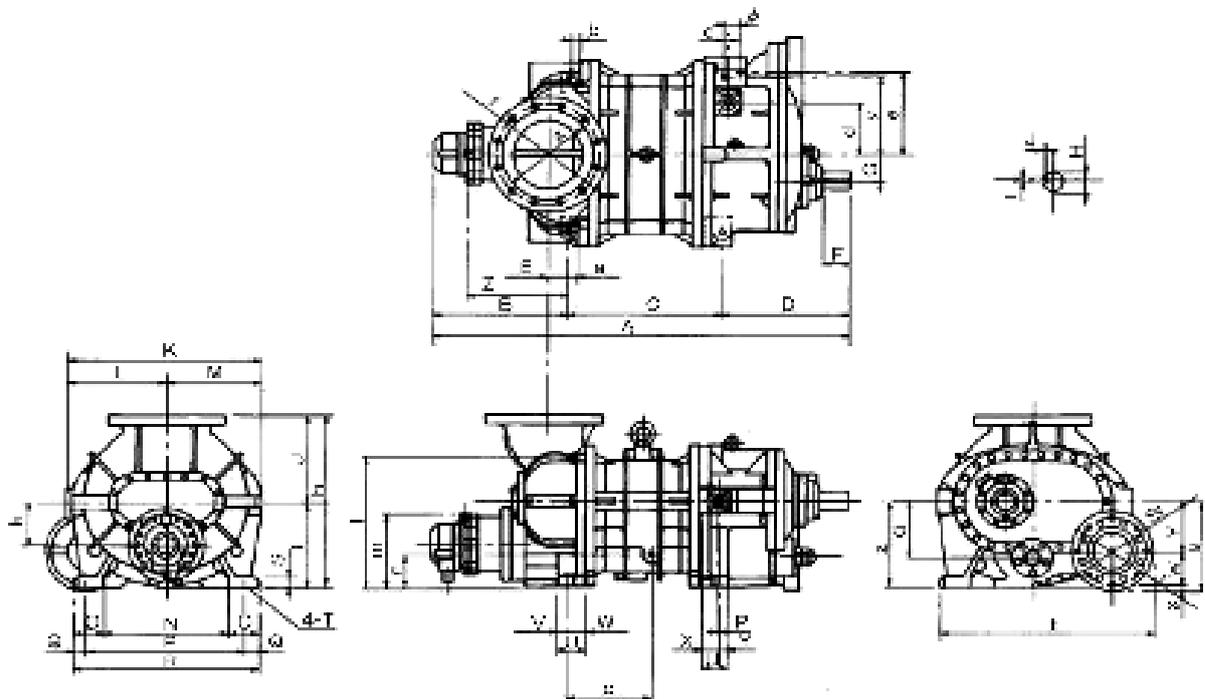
Outer Dimensions 160V*D, 200V*D, 250V*D, 250VLLD (Sideways discharge type)
